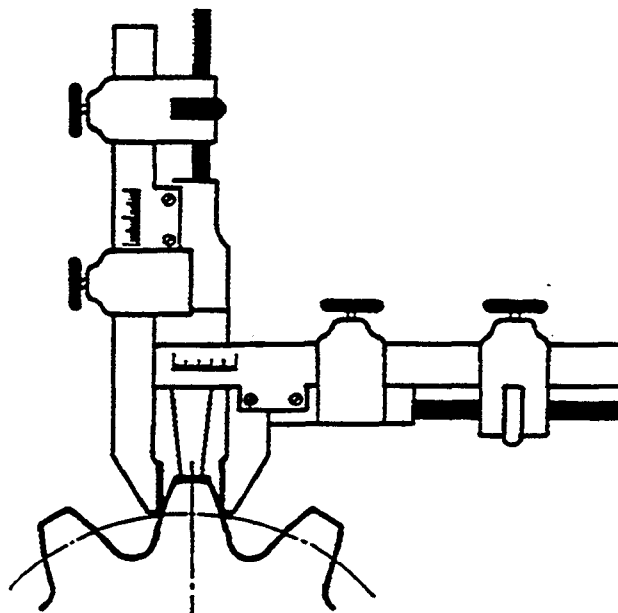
Chordal Tooth Thickness Measurement by Means of a Gear Tooth Caliper
